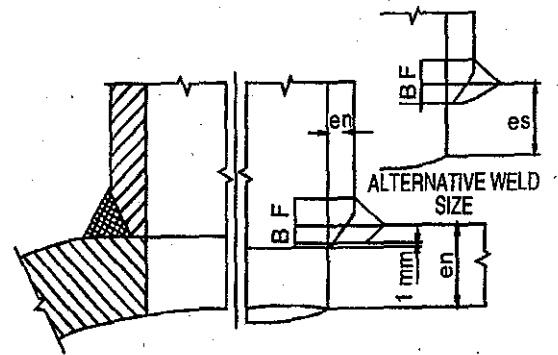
D — UNREINFORCED BRANCHES INACCESSIBLE FOR WELDING INSIDE SHELL
